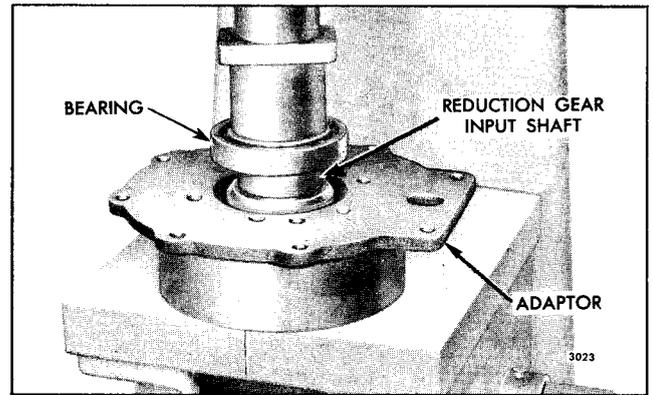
Installing Reduction Gear Input Gear Bearing on Input Gear (1.5:1 Ratio)
